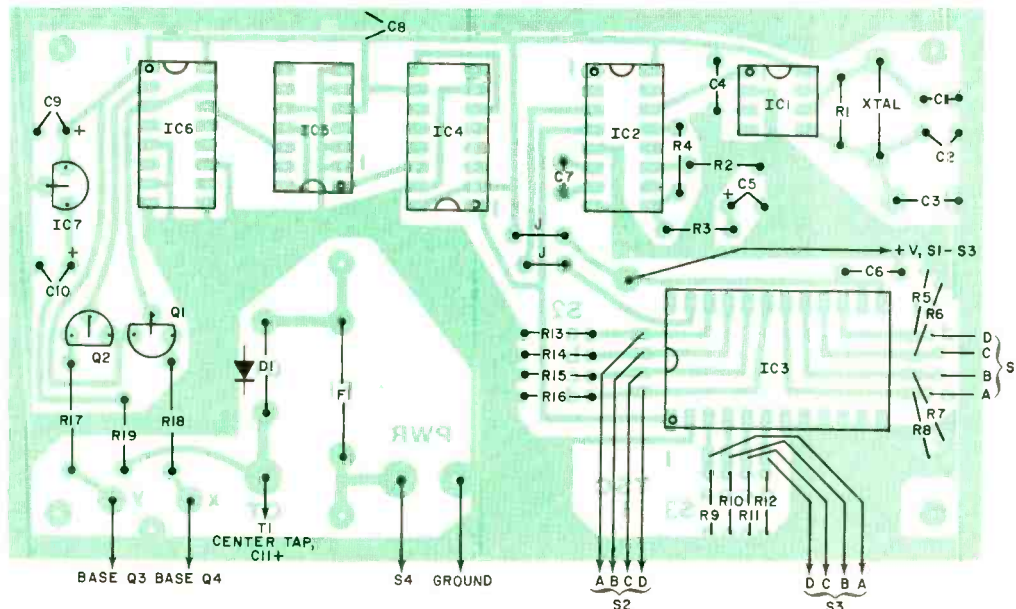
Use this guide to assemble the components on the printed-circuit board.
